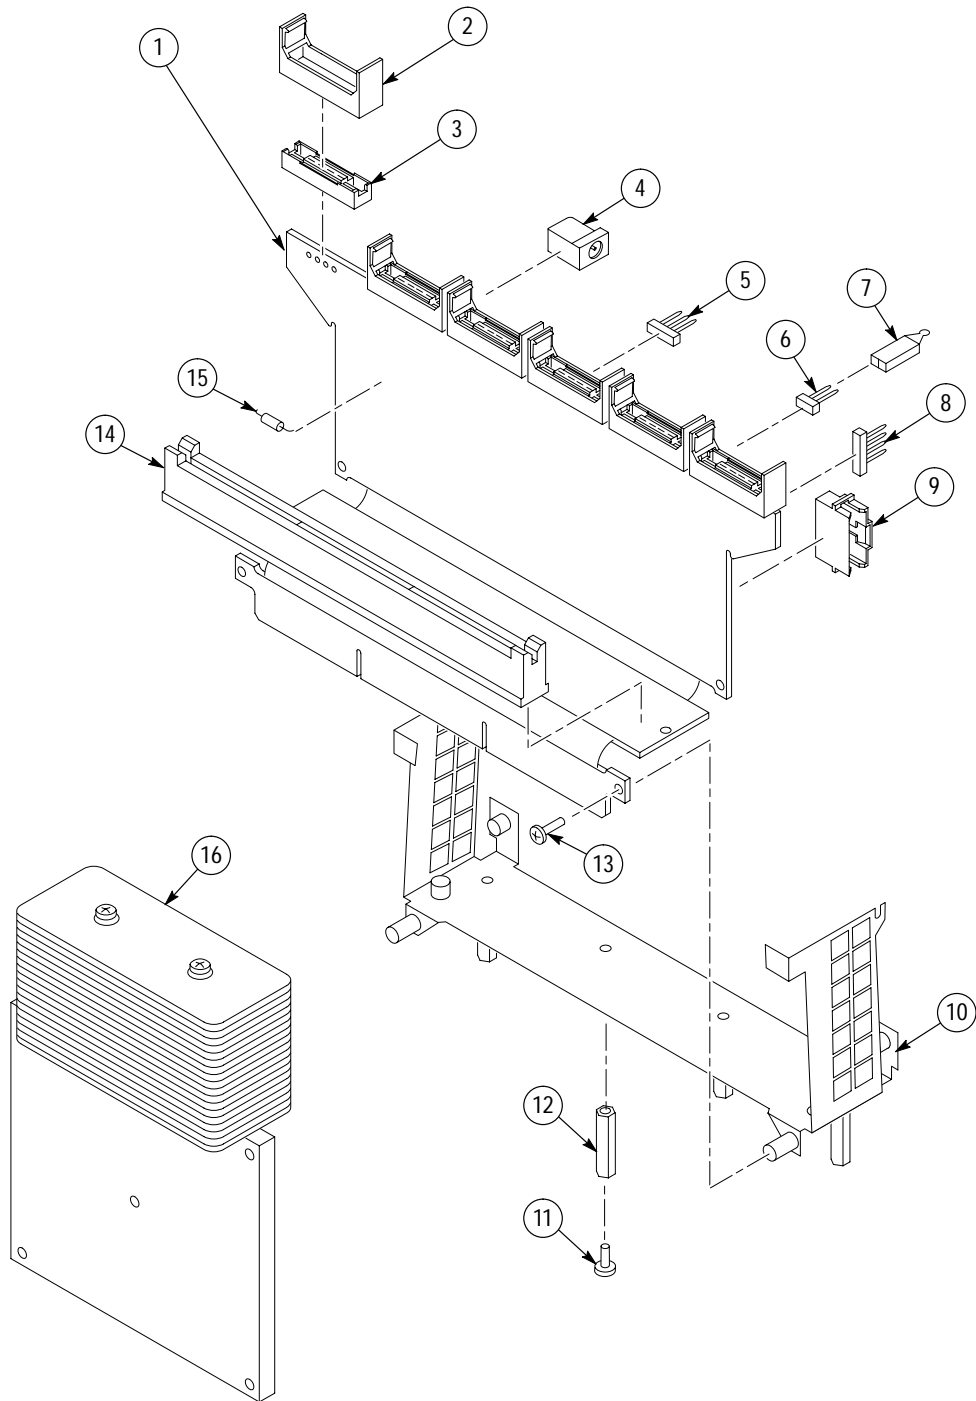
TMS S2A SC330 probe adapter exploded view
